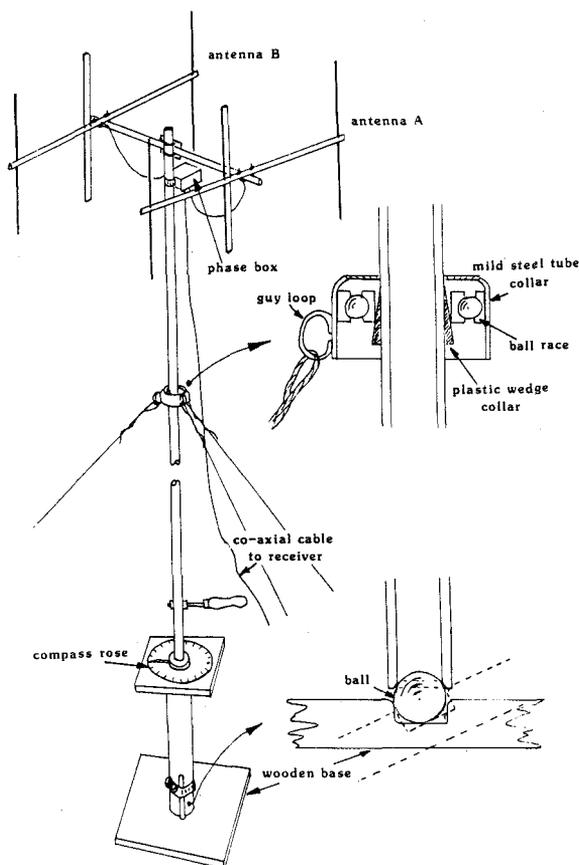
Antenna tower showing details of the top ball-race guying-collar and the lower single ball pivot on which the tower assembly rotates. The use of a single ball bearing as the lower support allows the bottom plate (a 40 cm<sup>2</sup> piece of 'form-ply'), to lie at an angle to the vertical axis of the mast, as for example when mounted on rocky ground, and still provide a secure pivot point (as indicated by the dotted lines). The upper ball race is anchored onto the mast tube by a wedge shaped piece of PVC conduit tubing, which is secured by cyanoacrylate cement to the mast. The steel cover is made from thin mild steel tubing, with the top swaged over to provide a rim which rests on the ball race. Three equally spaced loops are brazed to the cover (attempts to braze to the ball-race outer cage will result in destruction of the race). The race and the inside of the cover should be liberally packed with axle grease. Because the base plate can assume different angles to the mast, the length of PVC tubing to which the compass rose is attached is secured by 3 rods inserted into the base plate around the pivot hole and the tube is secured with a hose clamp once it has been aligned to due-north. Sizes of parts are not critical.
